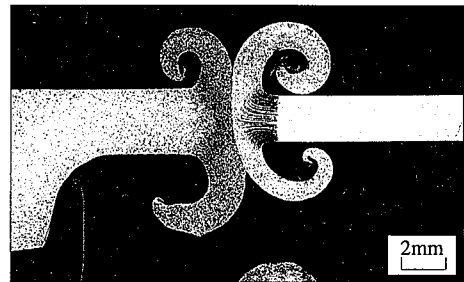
Cross section of friction weld (t = 1.6 mm)
